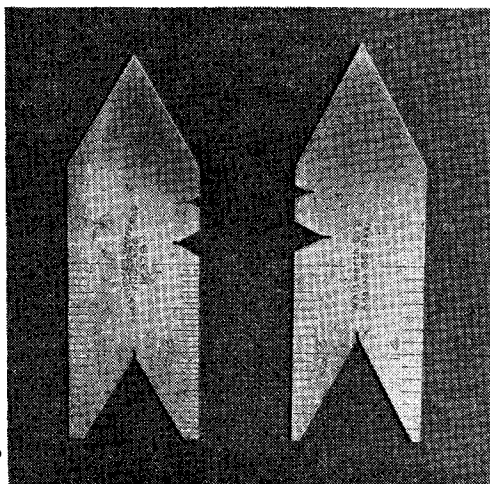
Tool-setting gauges for 60-deg. and 55-deg. threads
